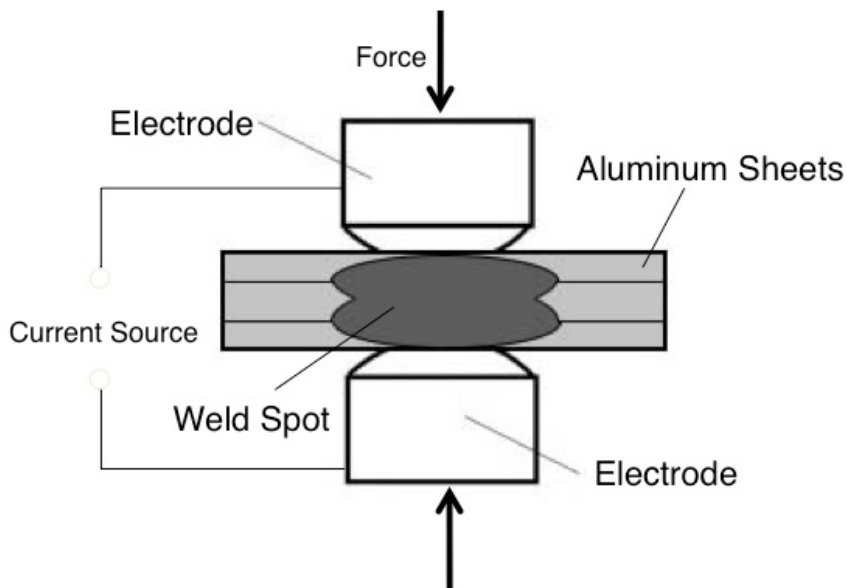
RSW 2-3-2 stackup for manufacturing of short fatigue crack growth specimens.
